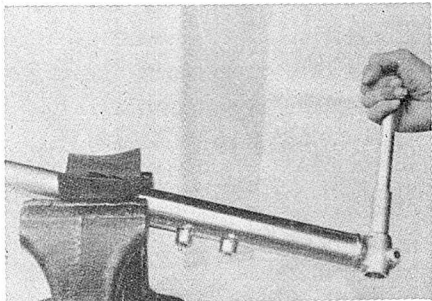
A discarded tire inner tube will provide ample protection for outer tube nut in vise.
